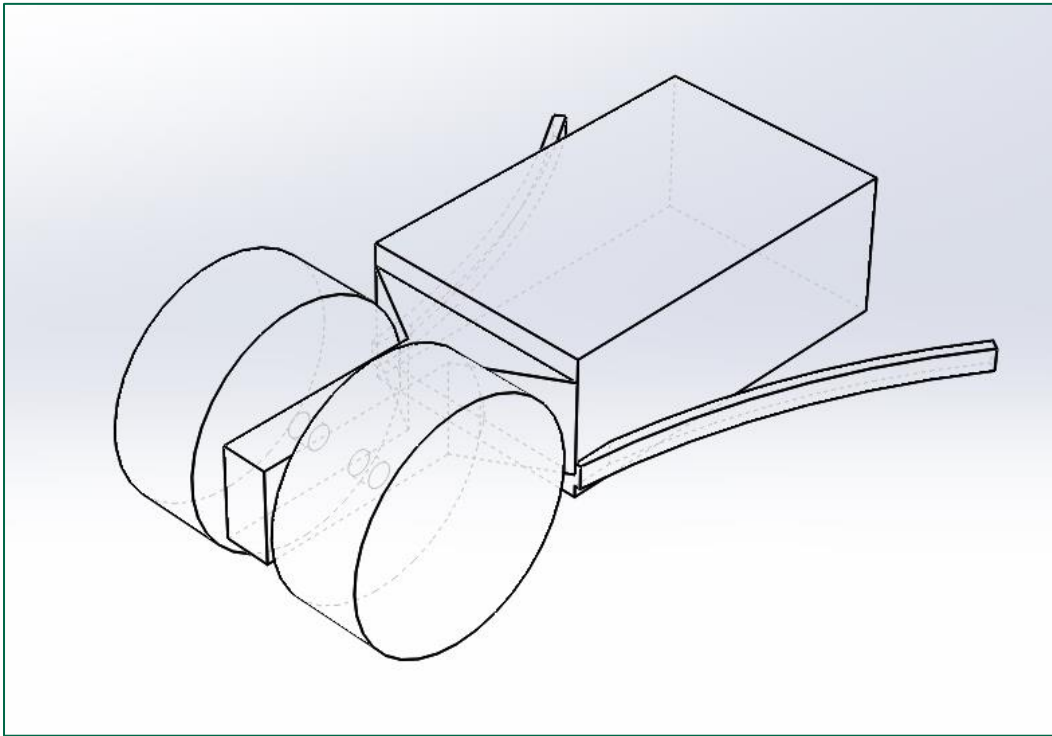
Concept sketch of proposed rover locomotion design. Sample collection system not shown.
